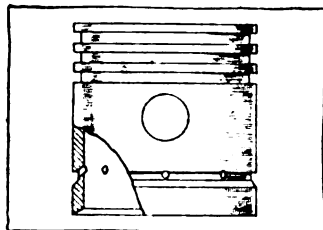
Another suggestion: To cure excessive lubrication to which some old cars are subject to, the pistons should have a narrow groove turned in the skirt with the lower edge of the groove beveled. With a No. 80 drill about six holes are drilled at equal distances around the piston and at an angle through the groove. The sharp edge at the top of the groove acts as a scraper and the surplus oil passes through the drilled holes, returning to the crankcase. No ring is placed in the slot. see chart 286-A, and page 202.
